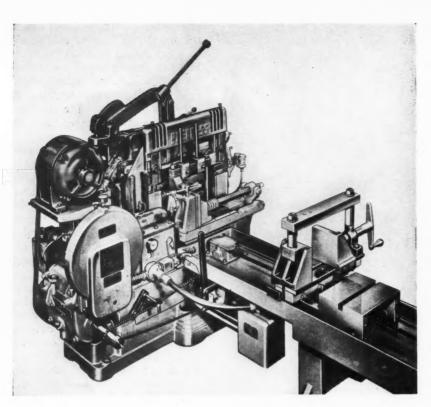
"Mechani-Cut" hacksawing machine with automatic feed conveyor
